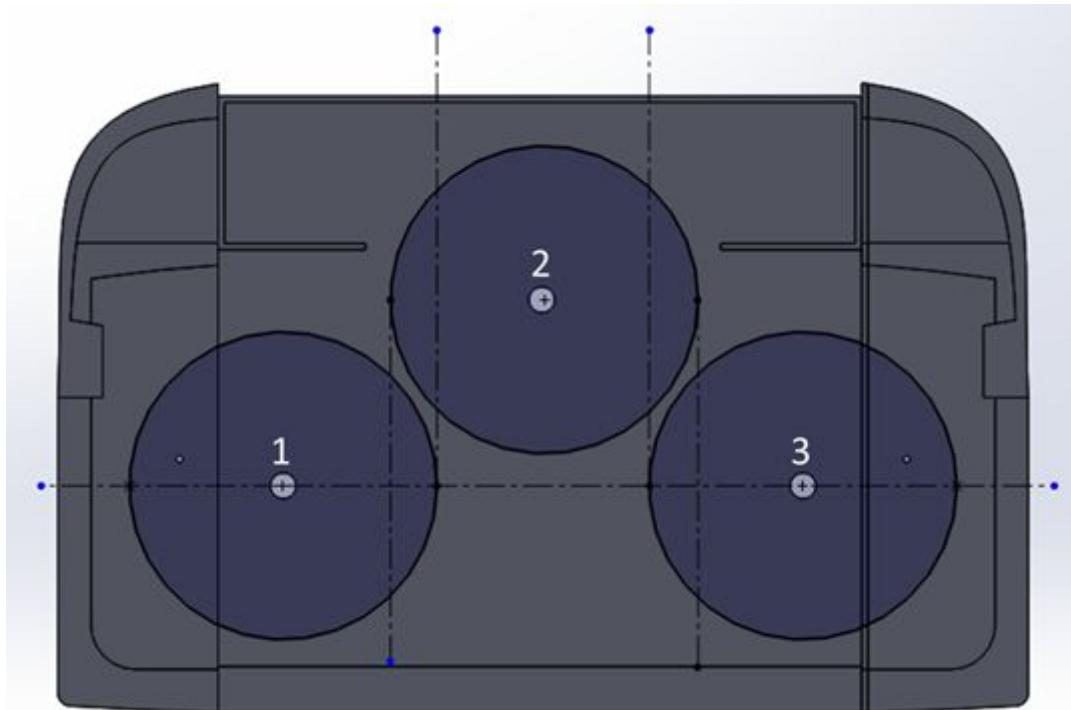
Bottom view of the chassis showing the numbering of the blades (1, 2 & 3)
